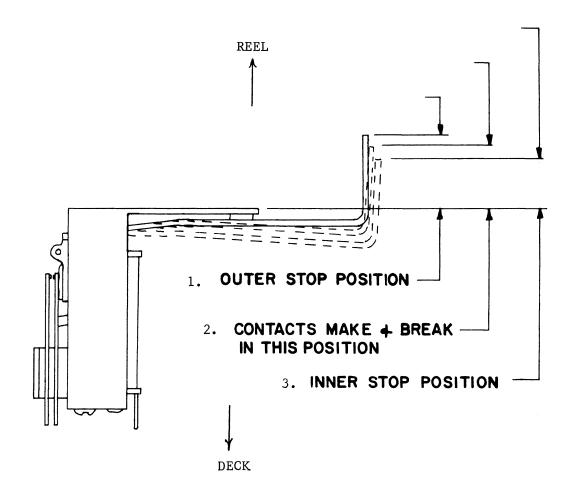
Reel Sensor Assembly (File Protect SW)
